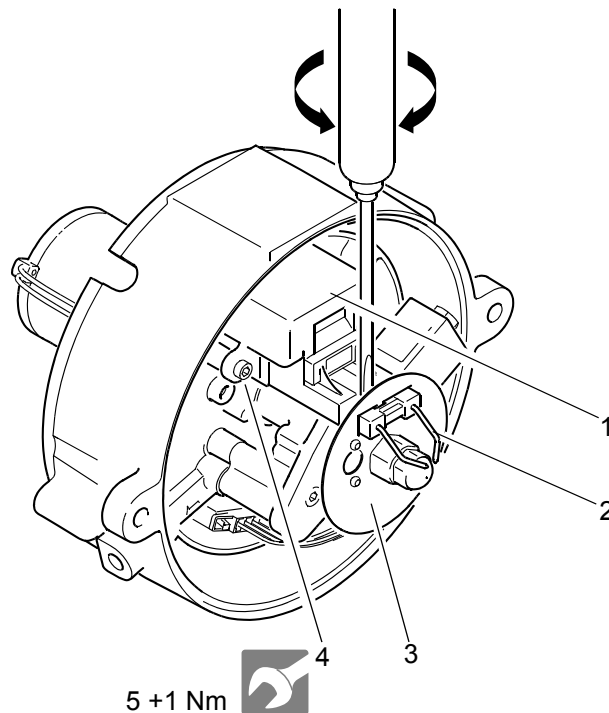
Removal of the electronic ignition unit / ignition electrode
